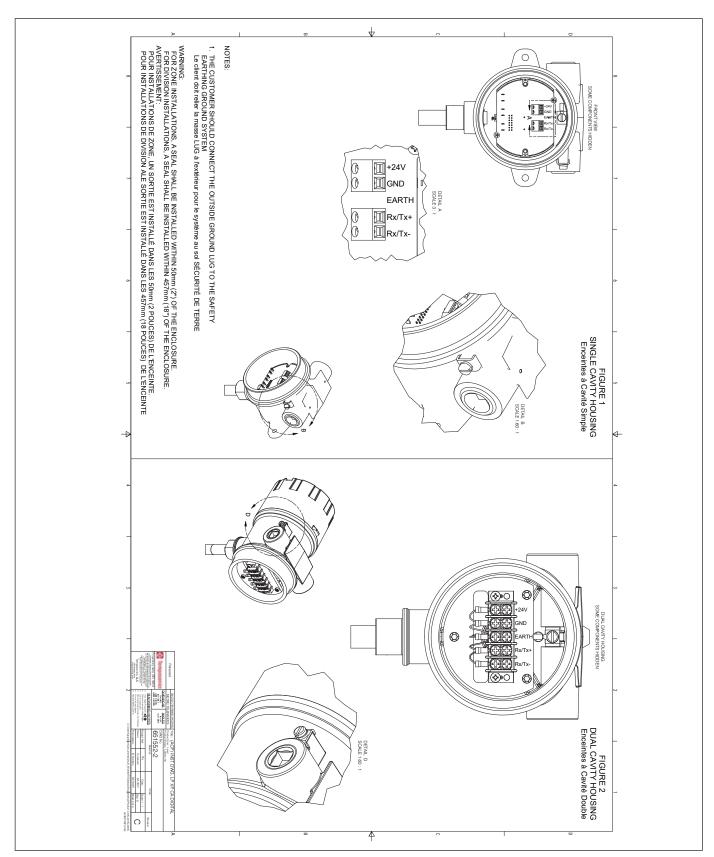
Explosionproof, FMC Installation Drawing, Modbus and DDA, Page 2
